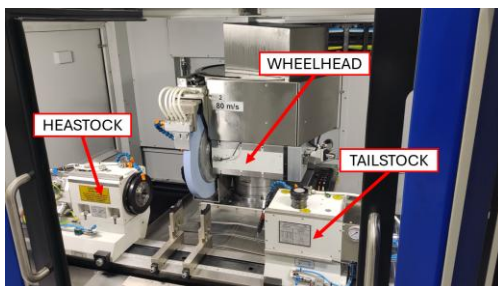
Cylindrical horizontal grinding machine from DANOBA
